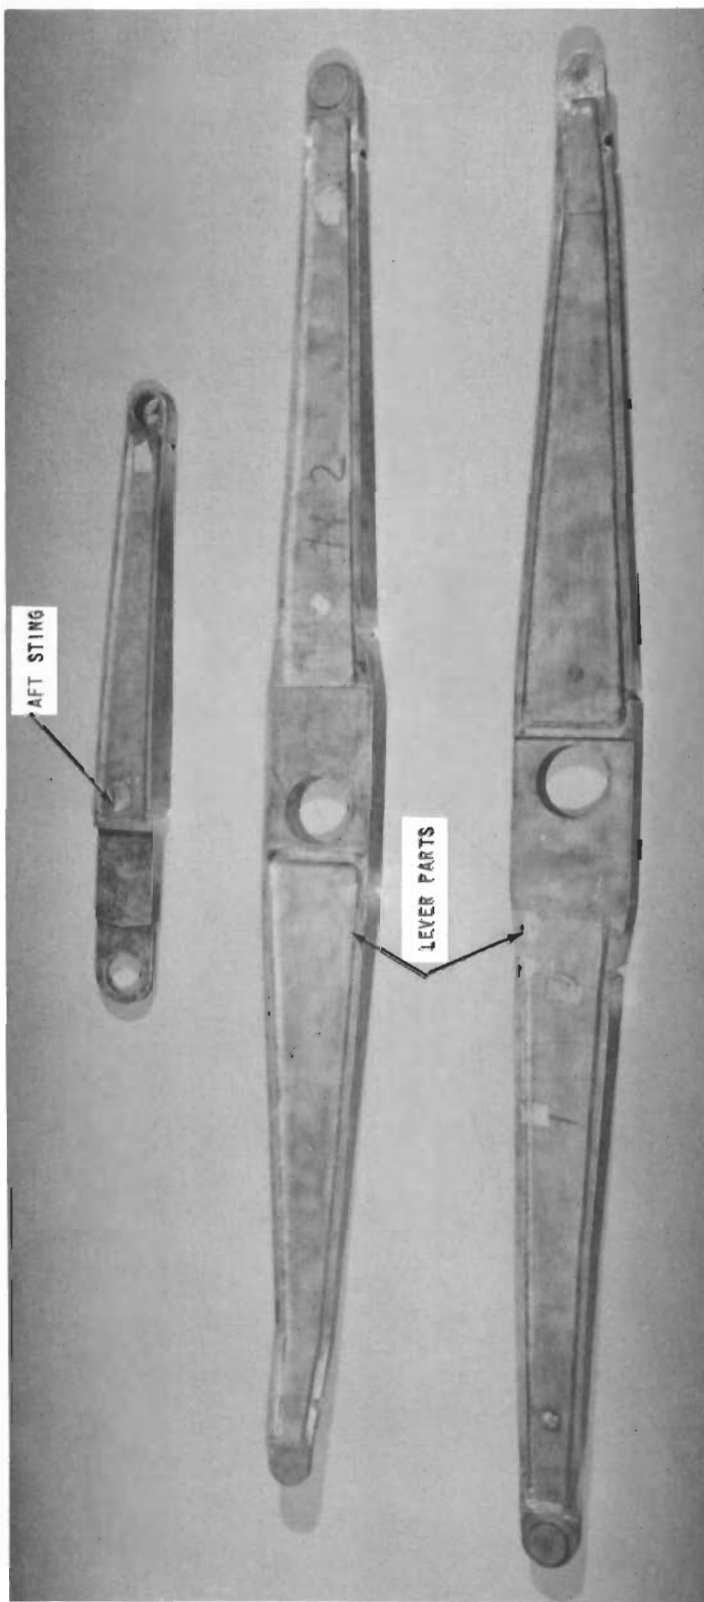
THE AFT STING AND THE LEVER WELDMENTS
